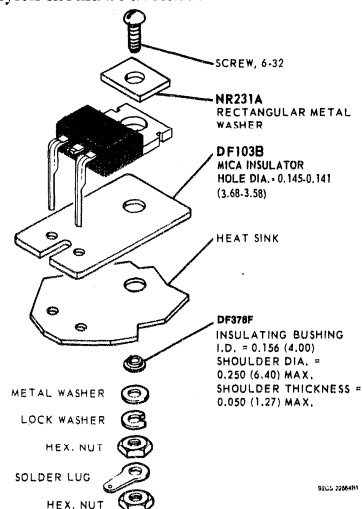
Chassis mounting of JEDEC TO-220AA version of RCA VERSAWATT devices.
